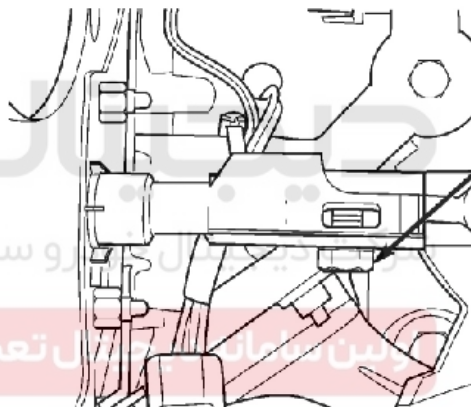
Release rod adjusting screw for the clutch master cylinder
